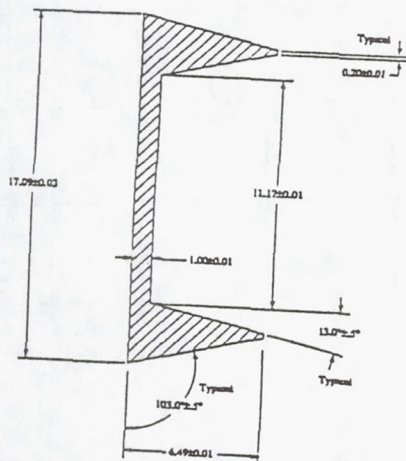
Shroud-seal for turbine. Dimensions in mm.
